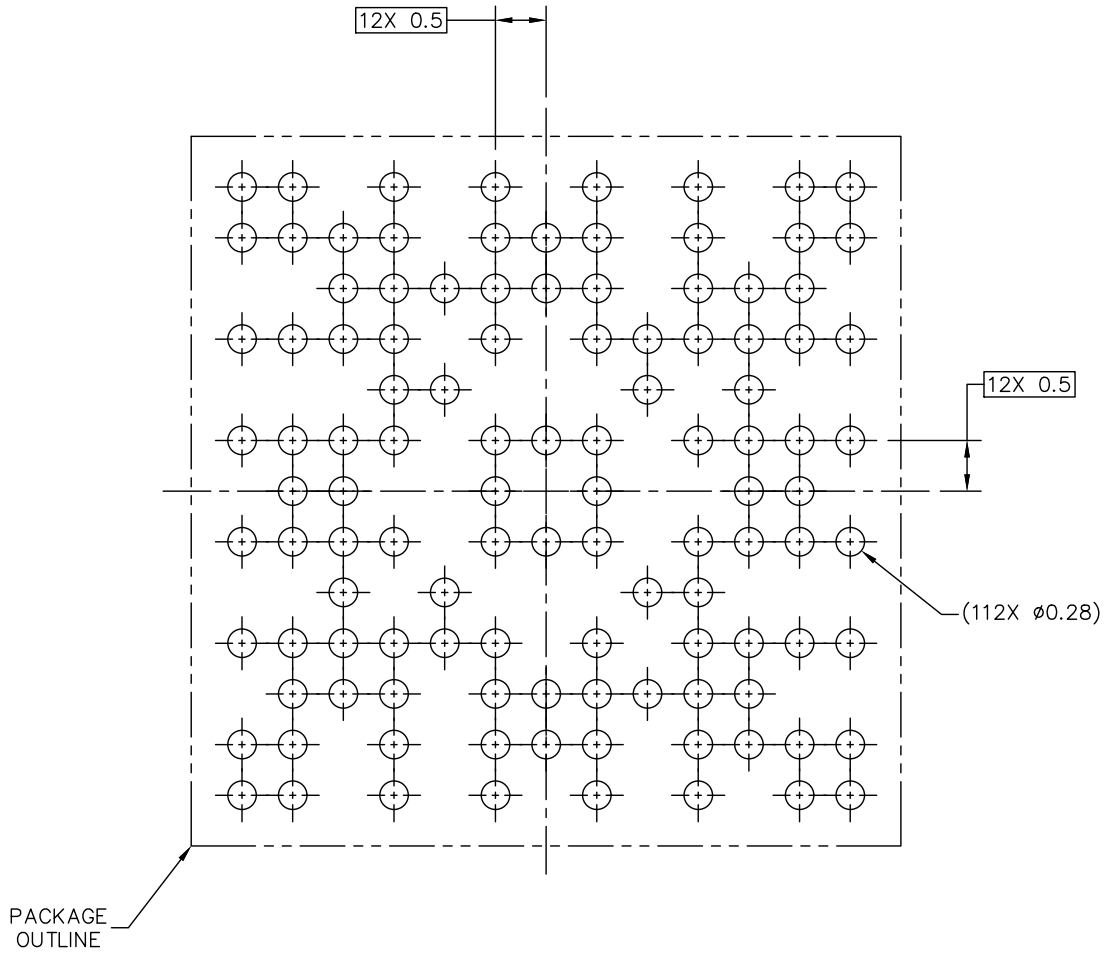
Reflow soldering footprint part1 for VFBGA112 (SOT2137-1)
